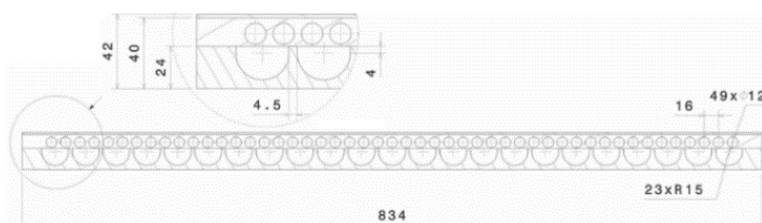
Technical drawing of the reflector plate showing the cross section with the cooling channels.
